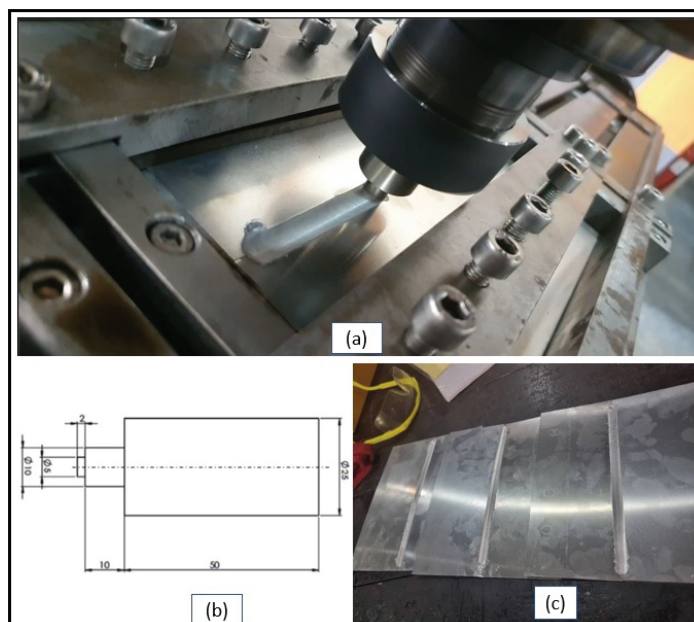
FSW (a) Process (b) Tool dimensions and (c) Welded blanks.
